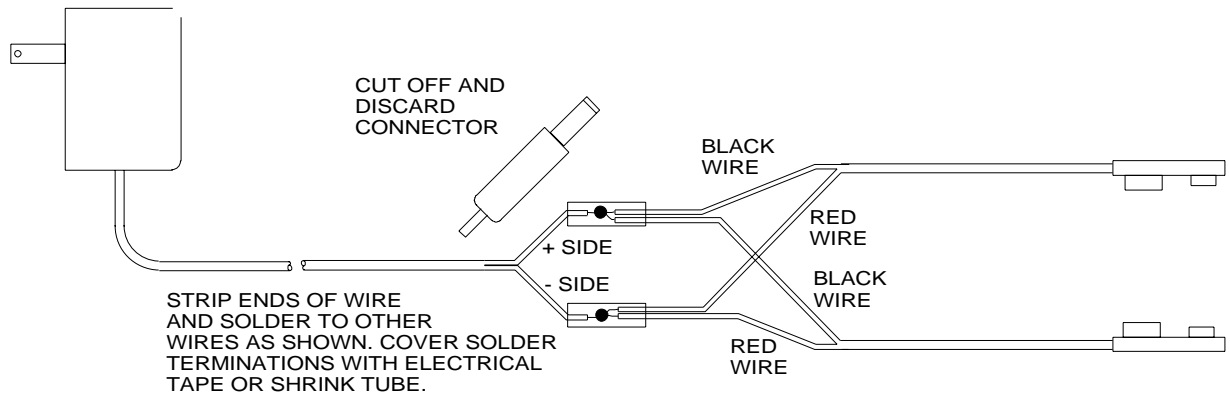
AC Power Supply Adapter Cable Assembly (alternate method).
